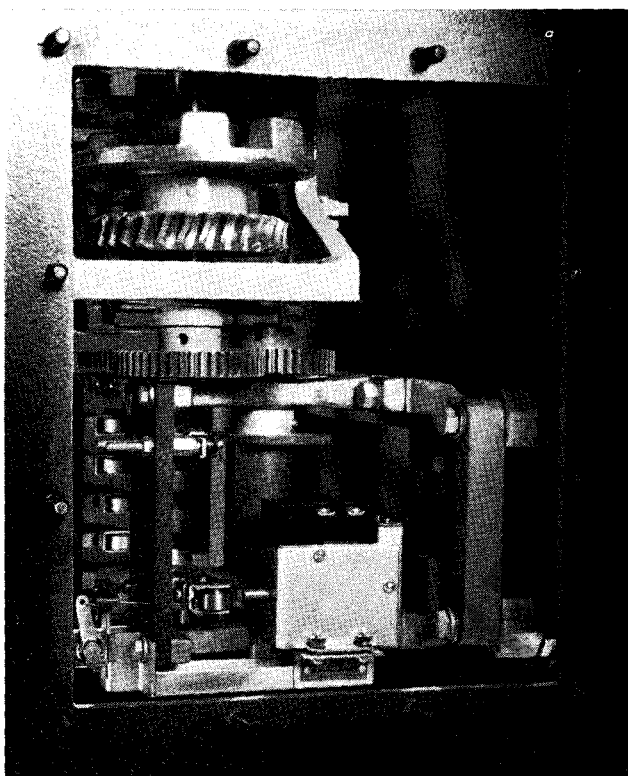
"DynAC Brake" As Installed on URS Cam Switch Assembly
